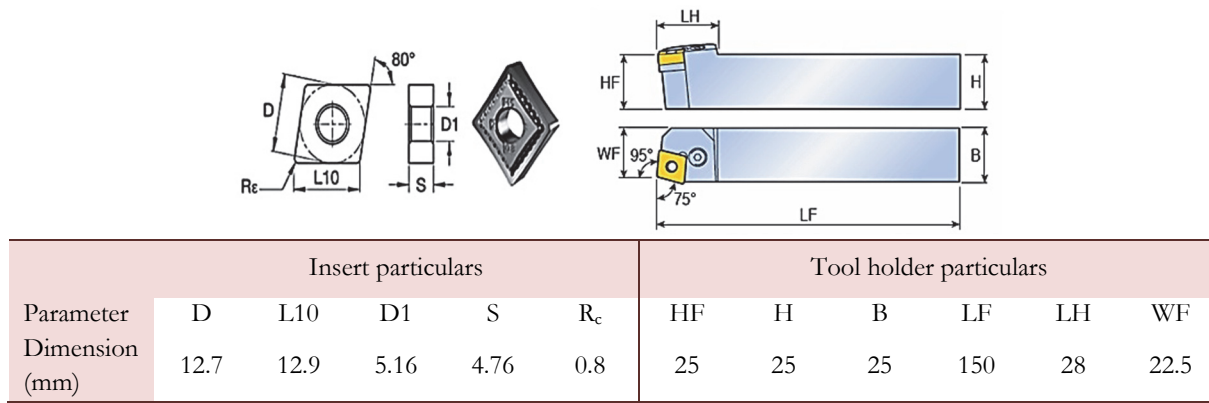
Cutting insert (CNMG120408MS) and tool holder (PCBNR2525M12) geometry.
